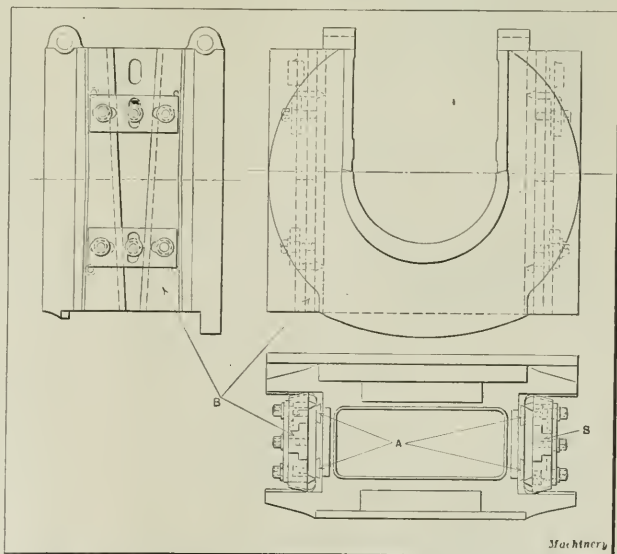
Driving-box and Fixture used when casting Brass Bearings on the Shoe and Wedge Faces
